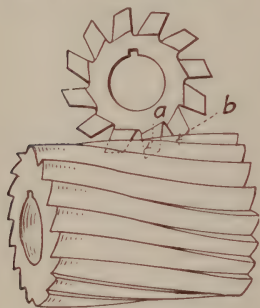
Hold a double-angle cutter in the groove of a spiral milling cutter with the cutting edges *a* vertical and touching the sides of the groove, then observe the amount of clearance (space) between the cutting edges *b* and the groove.
